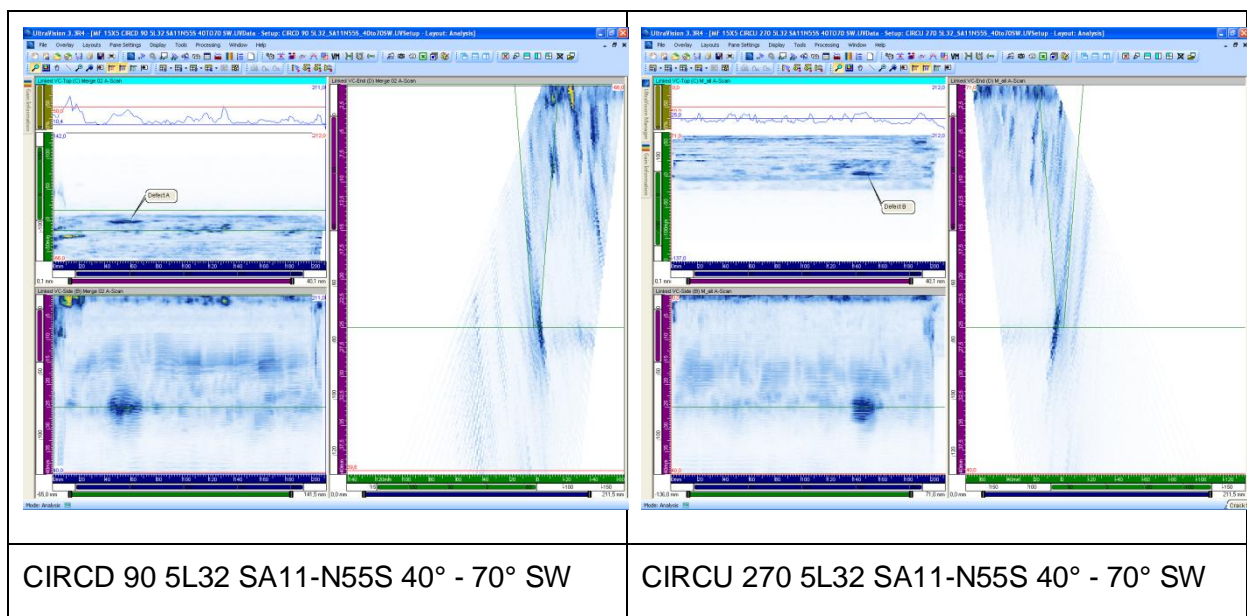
General views of weld MF scanned with technique PA-2 using 5 MHz probe.
